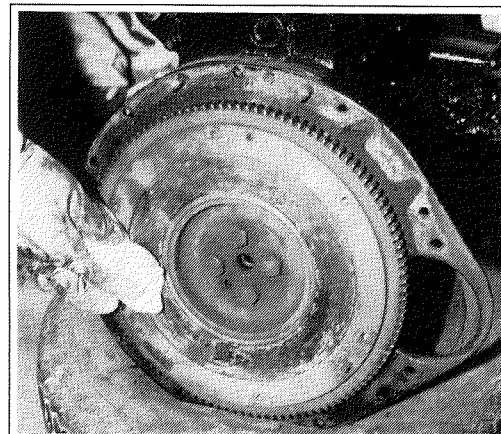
Prior to fitting a new clutch, give the flywheel a clean with thinners or some other suitable degreasing solvent.
